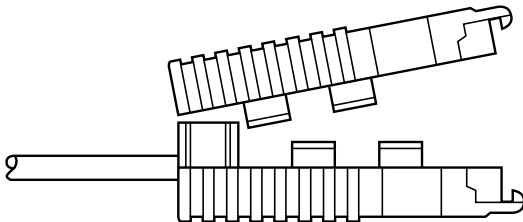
Pressing Together the Two Halves of the Strain-Relief Assembly.
